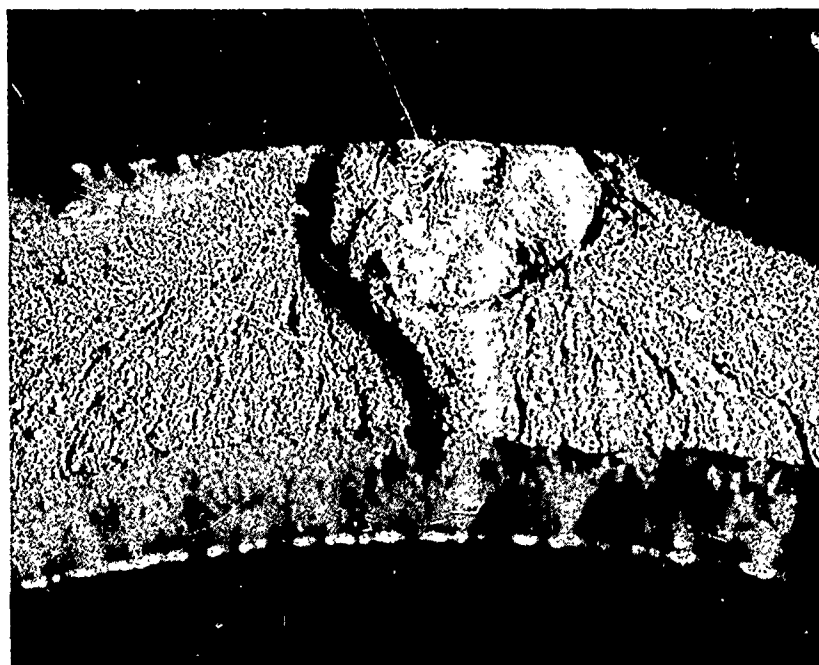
FRACTURE SURFACE OF FAILED 4330V MODIFIED STEEL CYLINDER
